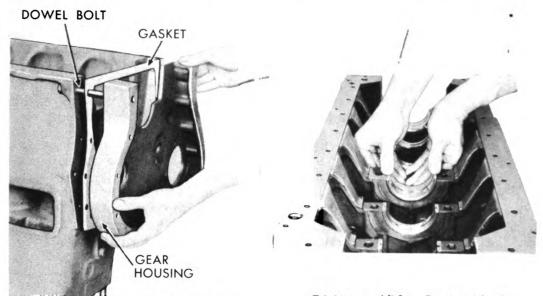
Installing Gear Housing. Figure 173. Inserting Main Bearing Upper Halves.
